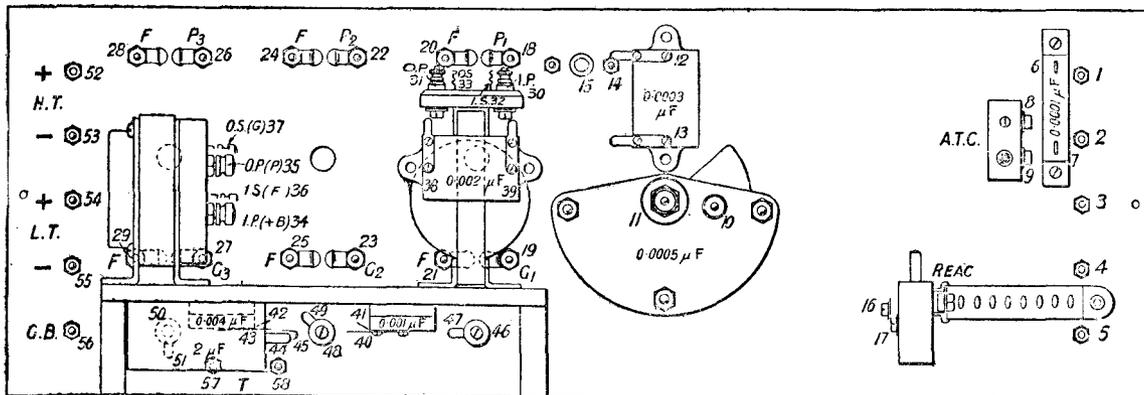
The back of the panel, with the parts numbered. The wires are omitted for the sake of clearness.
